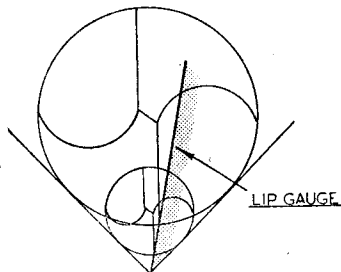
Lip gauge for maintaining the drill's cutting edge upright
